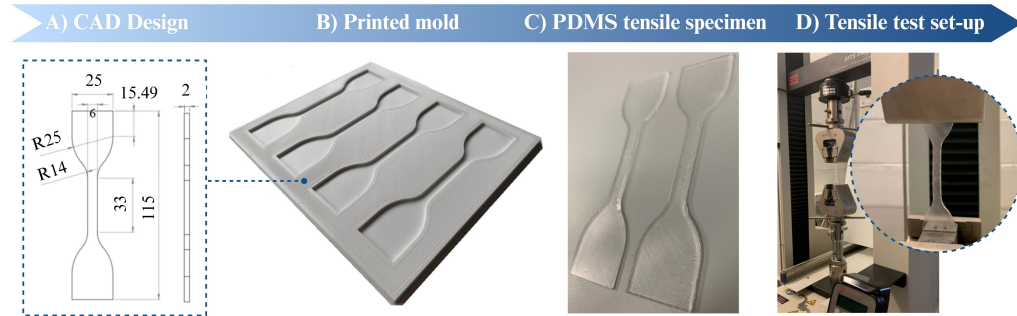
PDMS mechanical characterization. A) CAD design of the mold to obtain the samples sized in accordance with the ASTM D412 standard. B) Mold printed in PLA using a FDM 3D printer. C) Fabrication of the PDMS tensile specimens. D) Set-up for tensile testing: samples positioned between the testing machine grips.
